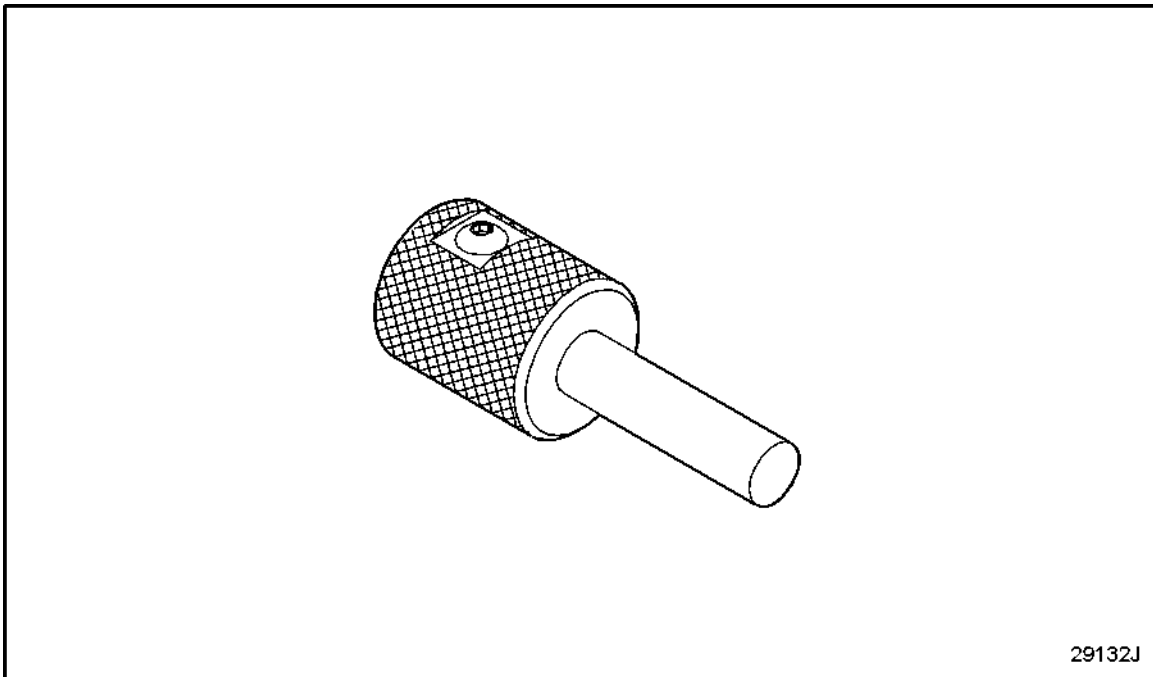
Block Head Bolt Hole Depth Gage,J 26244
